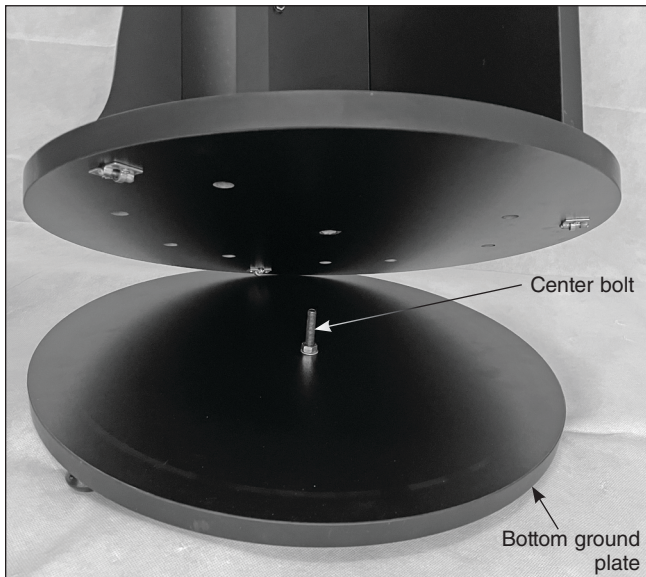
Place the base assembly over the bottom ground plate so that the center bolt aligns with the center hole in the top ground plate.
